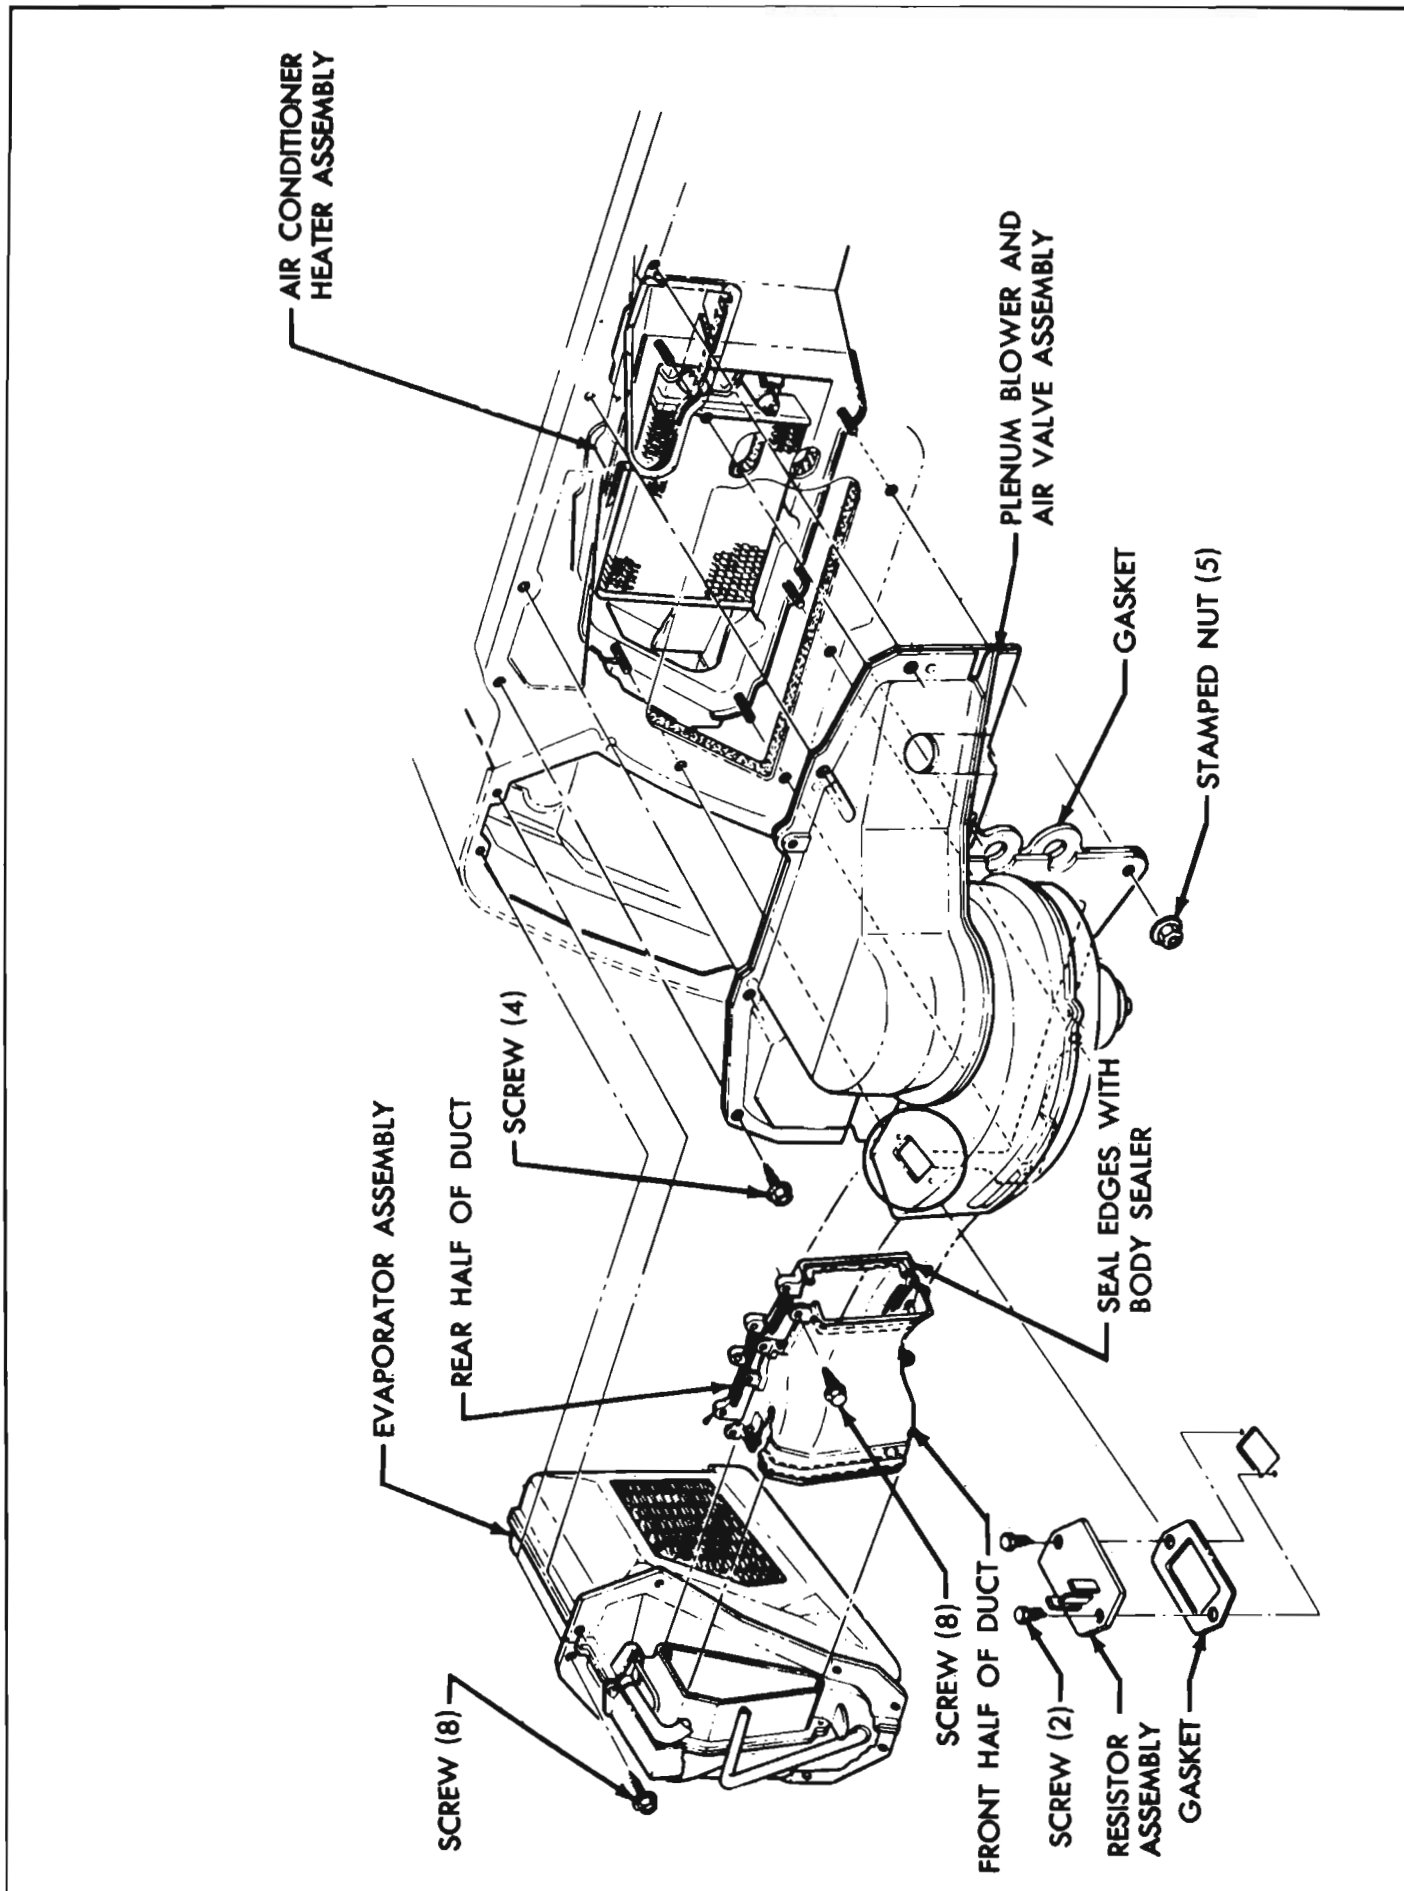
Evaporator Assembly, and Plenum Blower and Air Valve Assembly Installation
